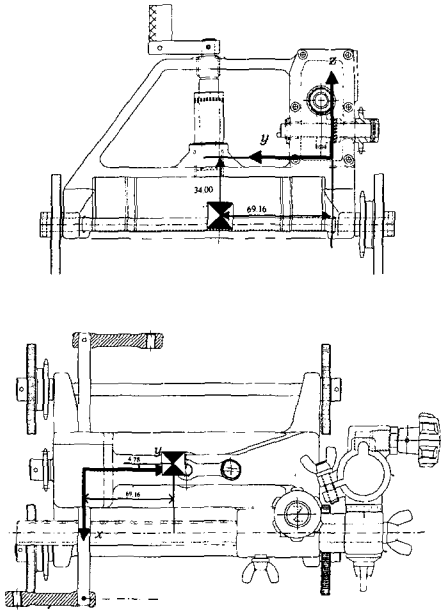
Mass of center for improved automatic pipe-cutting machine
